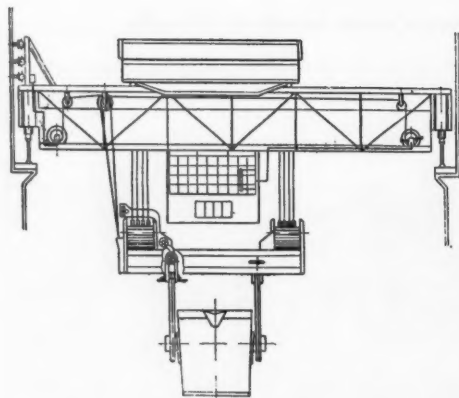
160-ton ladle crane with electronic scale built into the cross member.
